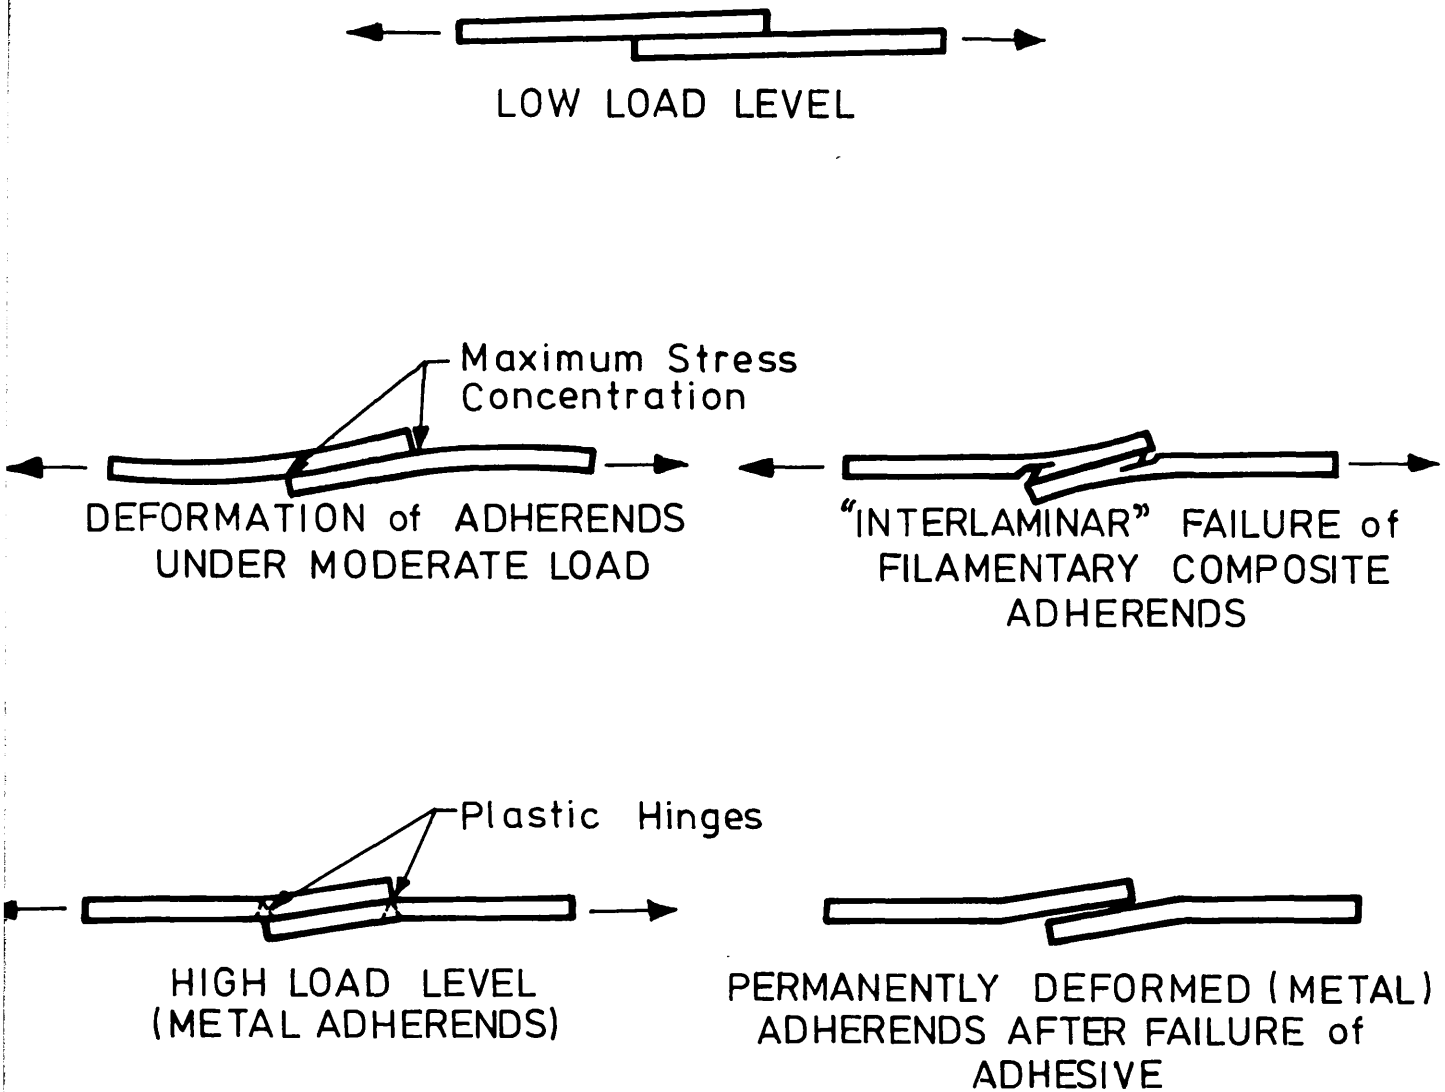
VARIOUS FAILURE MECHANISMS OF BONDED JOINTS⁶⁶
